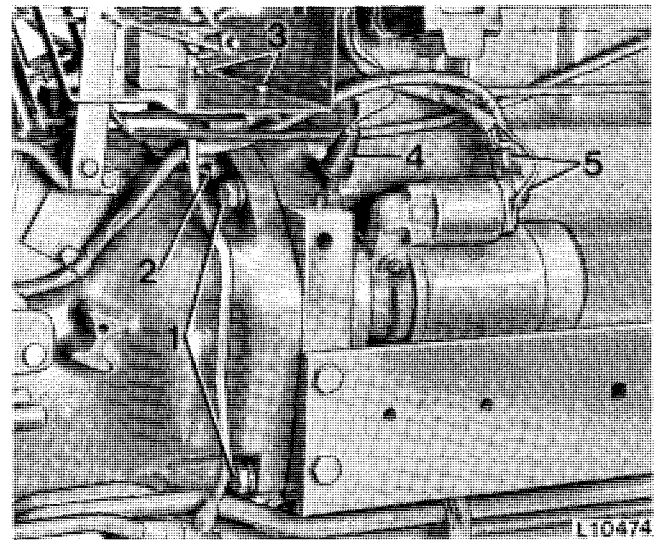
Separating between Engine and Clutch Housing, R.H. Side
